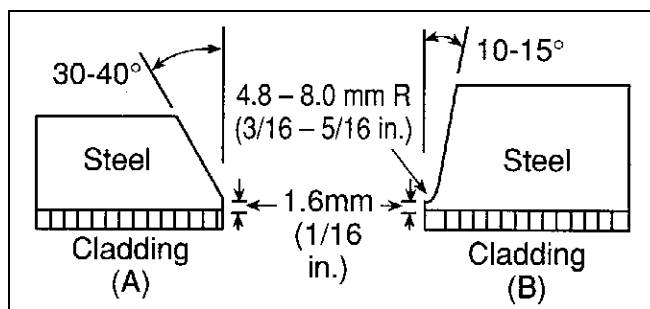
Joint designs for clad steel. (A) Material 4.8 to 16mm (3/16 to 5/8 in.) thick. (B) Material 16 to 25mm (5/8 to 1 in.) thick (courtesy of Inco Alloys International — Joining Technical Bulletin)
